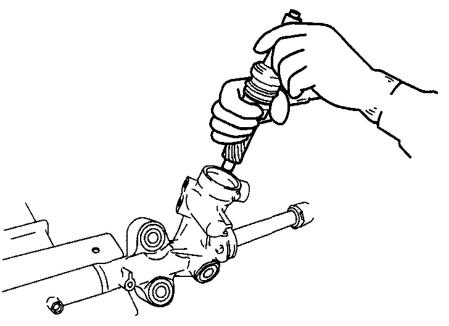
Removing Pinion Plug Using SST Courtesy of MAZDA MOTORS CORP.
